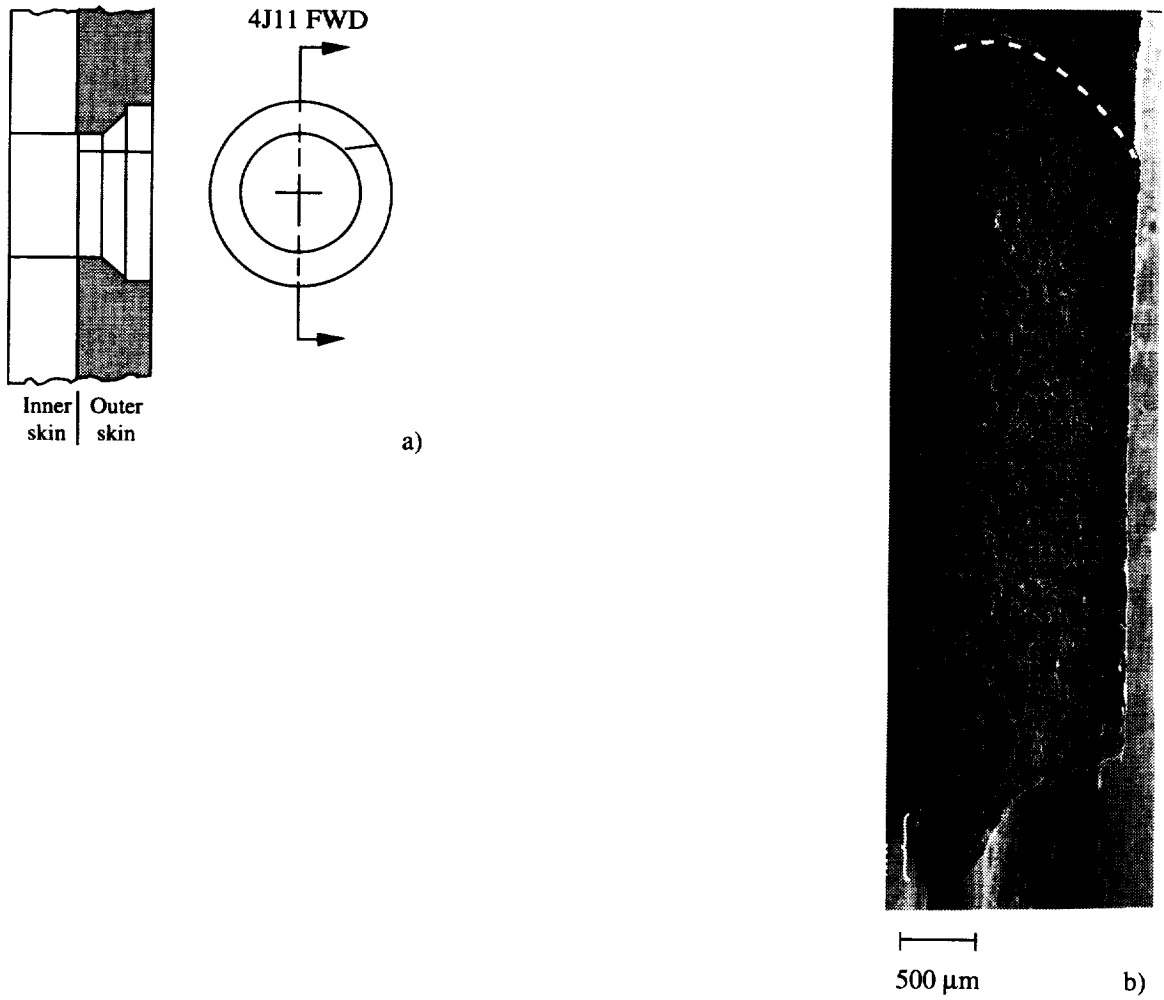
a) The schematic shows the rivet hole 4J11 configuration and the location of the outer skin fatigue crack oriented in the forward direction and about the 2 o'clock position. b) The SEM micrograph shows the fatigue crack fracture surface located at the outer skin rivet hole (bottom). The bracket shows the likely region of crack initiation and the dashed line marks the fatigue crack front.
